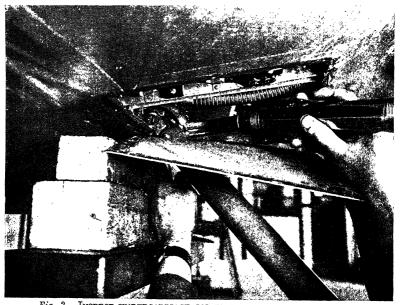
Inspect undercarriage joints and general assembly Examining attachment of axle tube to fuselage.
